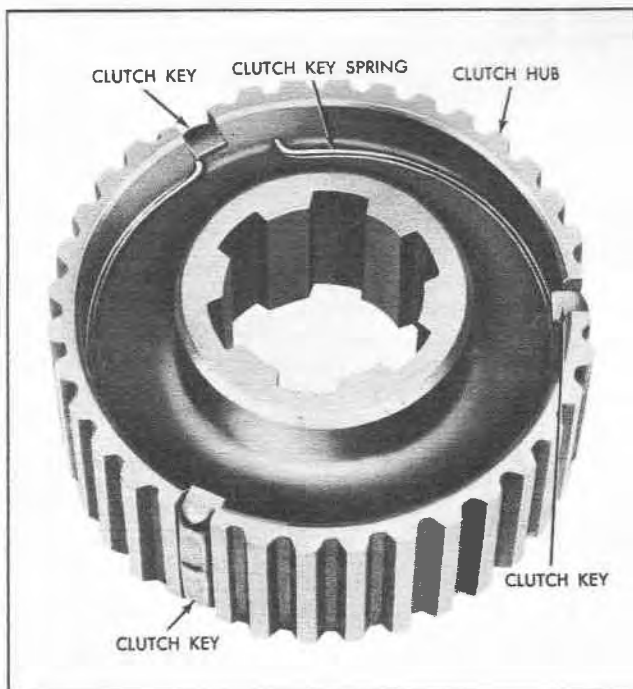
Clutch Keys and Synchronizer Springs Installed on Clutch Hub
